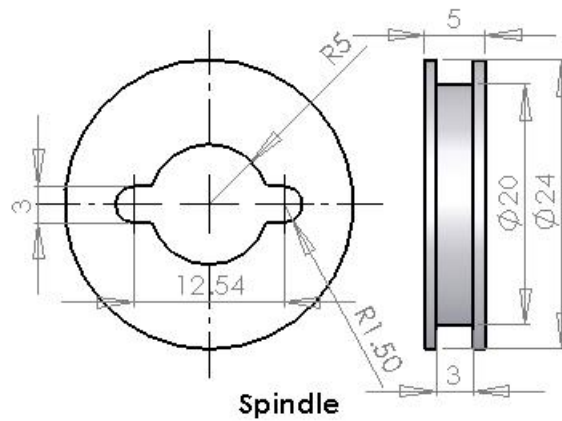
Spindle for Torque-Speed Measurement (Motor S)
